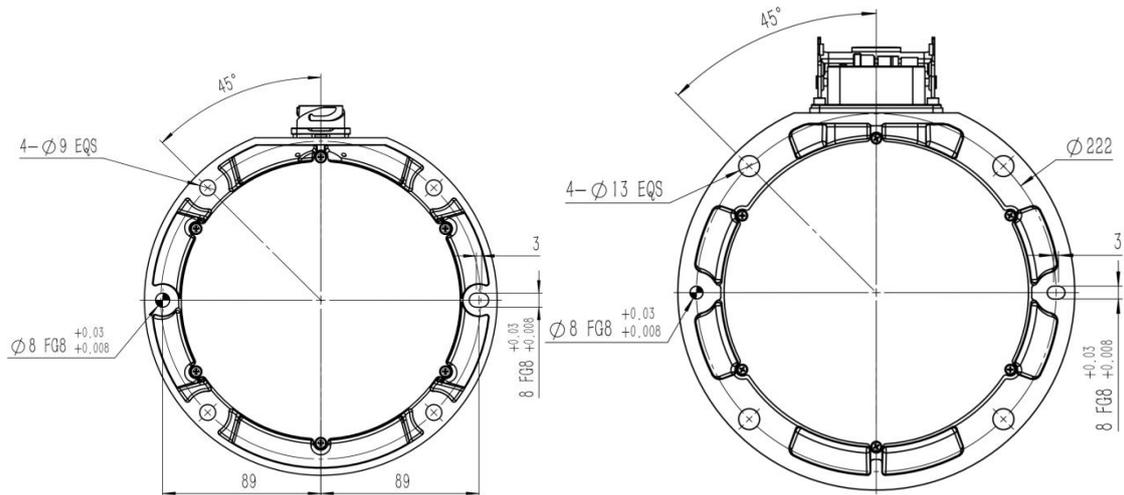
Mechanical mounting ports for the - S10-140 and S20-180 pedestals
